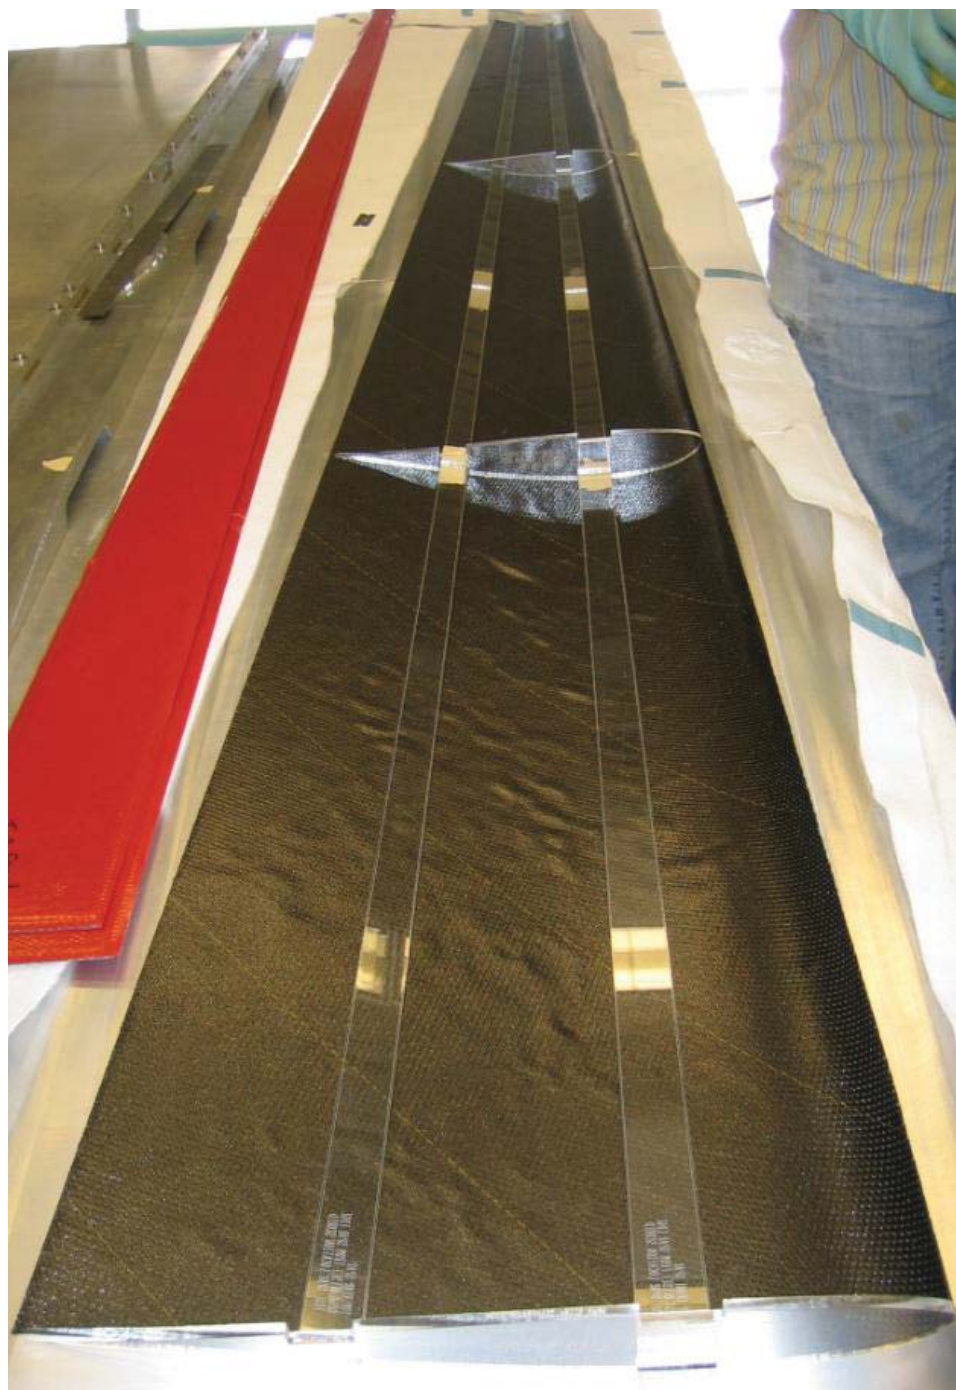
Top wing skin core location tools temporarily placed on laminate during layup.
